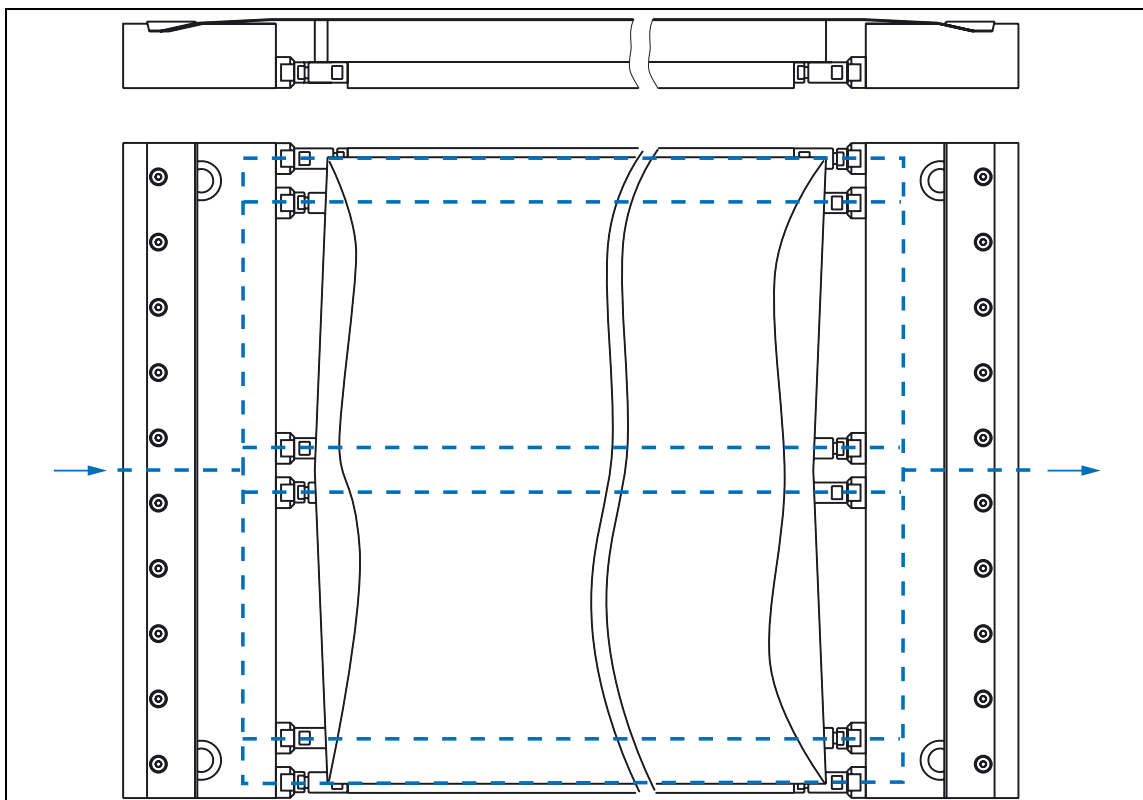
Secondary section cooling for 1FN3600- and 1FN3900-type motors with combi distributors (side and top view)
